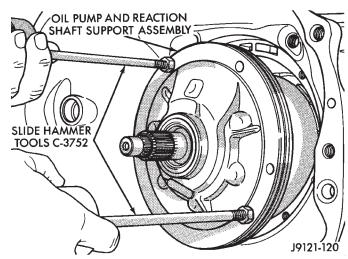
Removing Oil Pump And Reaction Shaft Support Assembly
